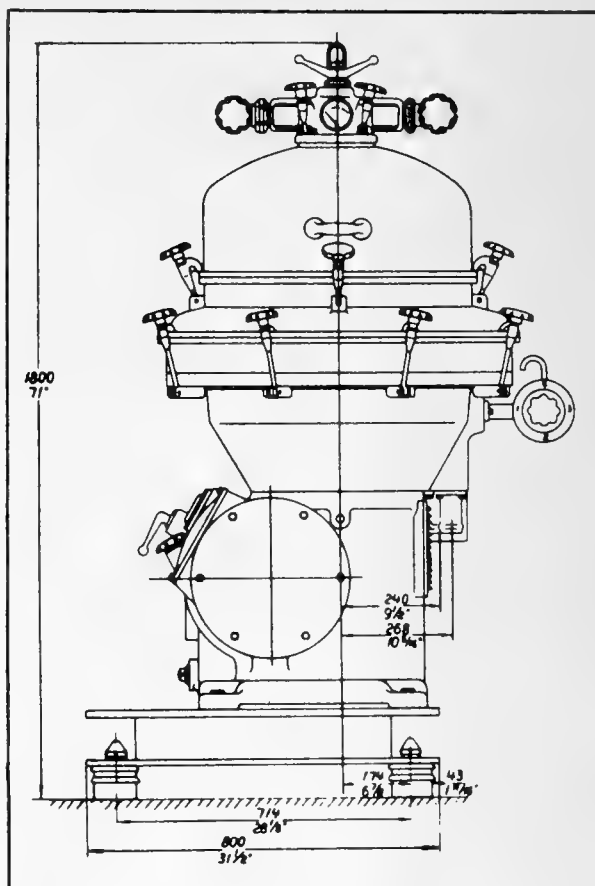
Self-cleaning separator, one of several pieces of equipment used in purifying rinsing water.
